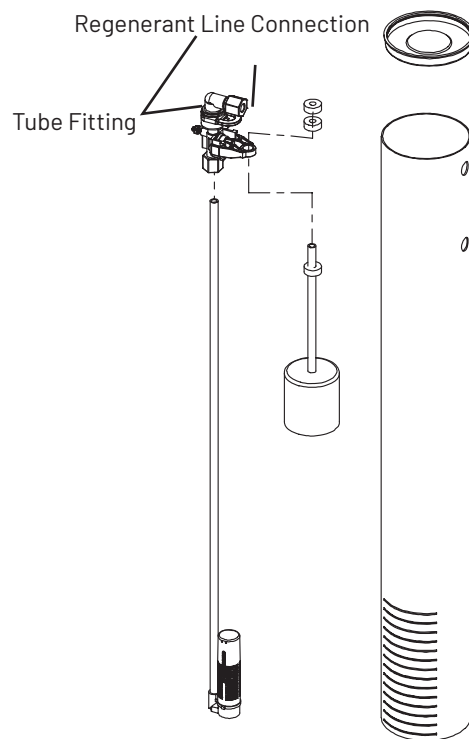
Salt Tank Safety Brine Valve and Brine Well Assembly
